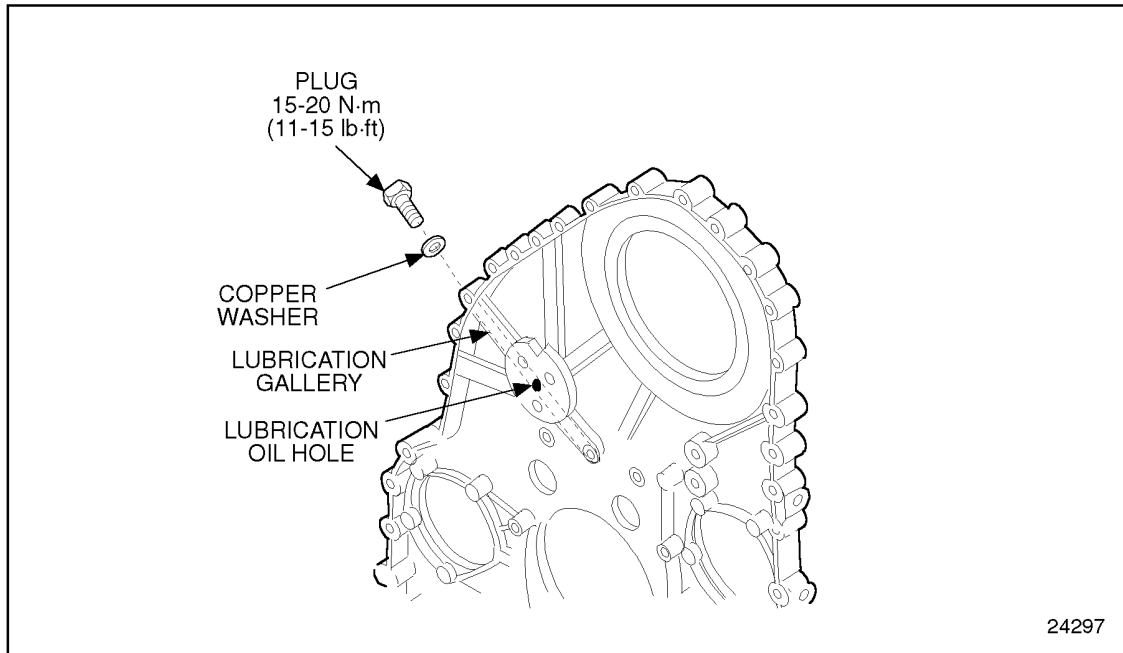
Adjustable Idler Gear Lubrication Gallery
